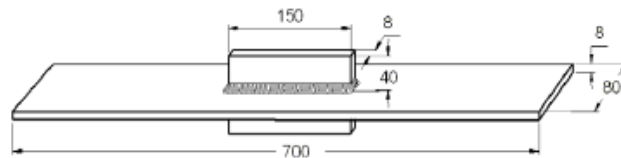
Welded specimen for fatigue testing of 350 and 700 MPa yield strength steel welded elements [11]
